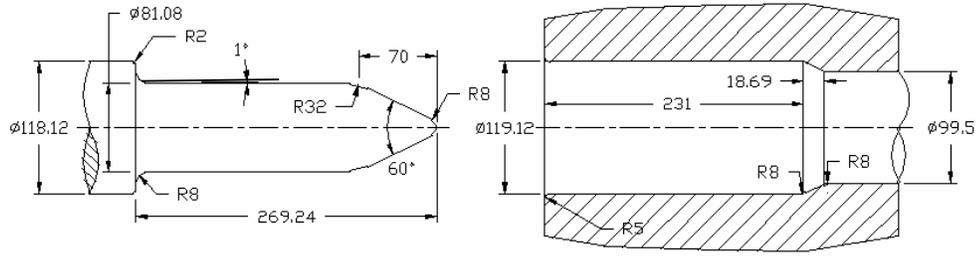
Header tool and gripper die of 2nd stage [3]
